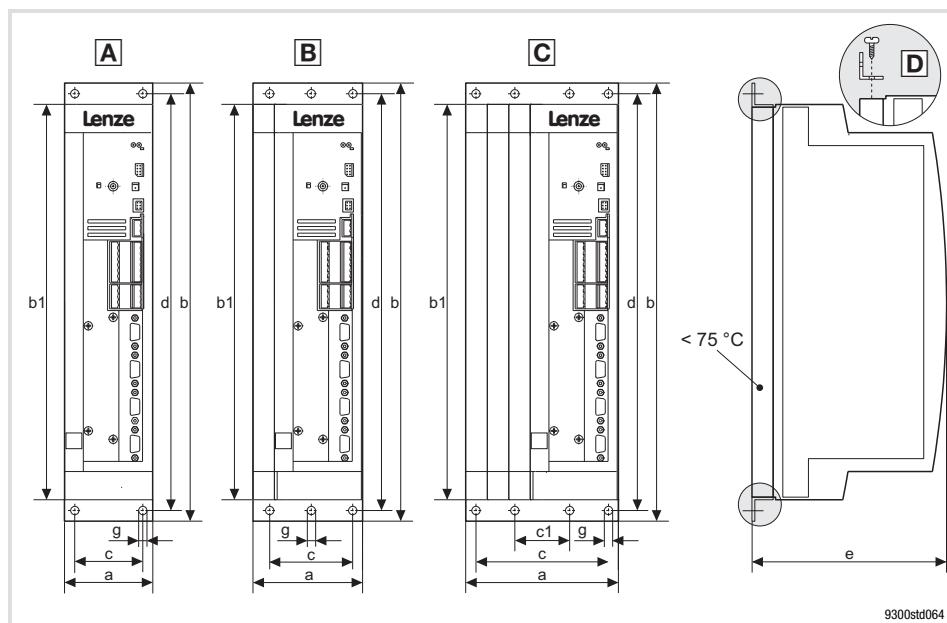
Dimensions for mounting in "cold plate" technique 0.37 ... 11 kW
